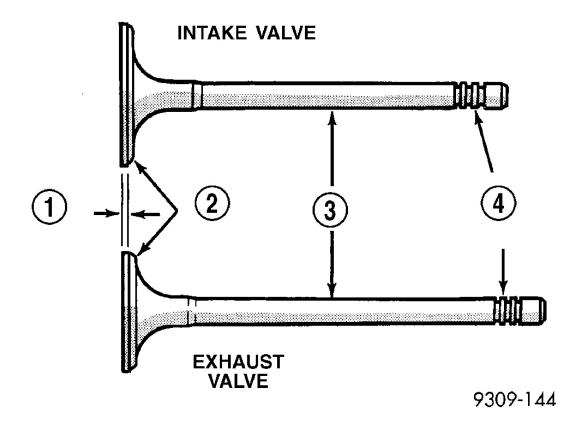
Intake & Exhaust Valves Courtesy of CHRYSLER LLC
